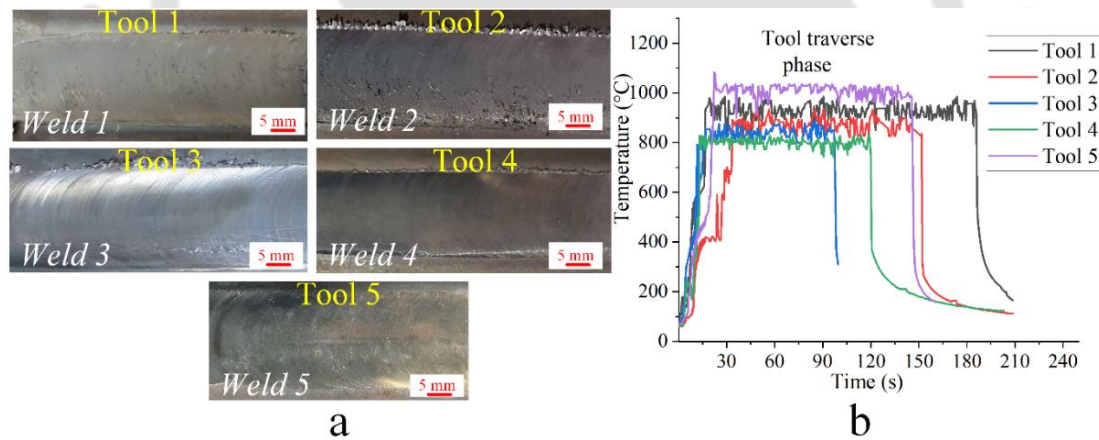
Weld joint characterization: (a) top surface appearances of the welded plates at different welding conditions, and (b) transient thermal history of the welding condition using non-contact infrared (IR) camera (The scan was made along the welding direction)
